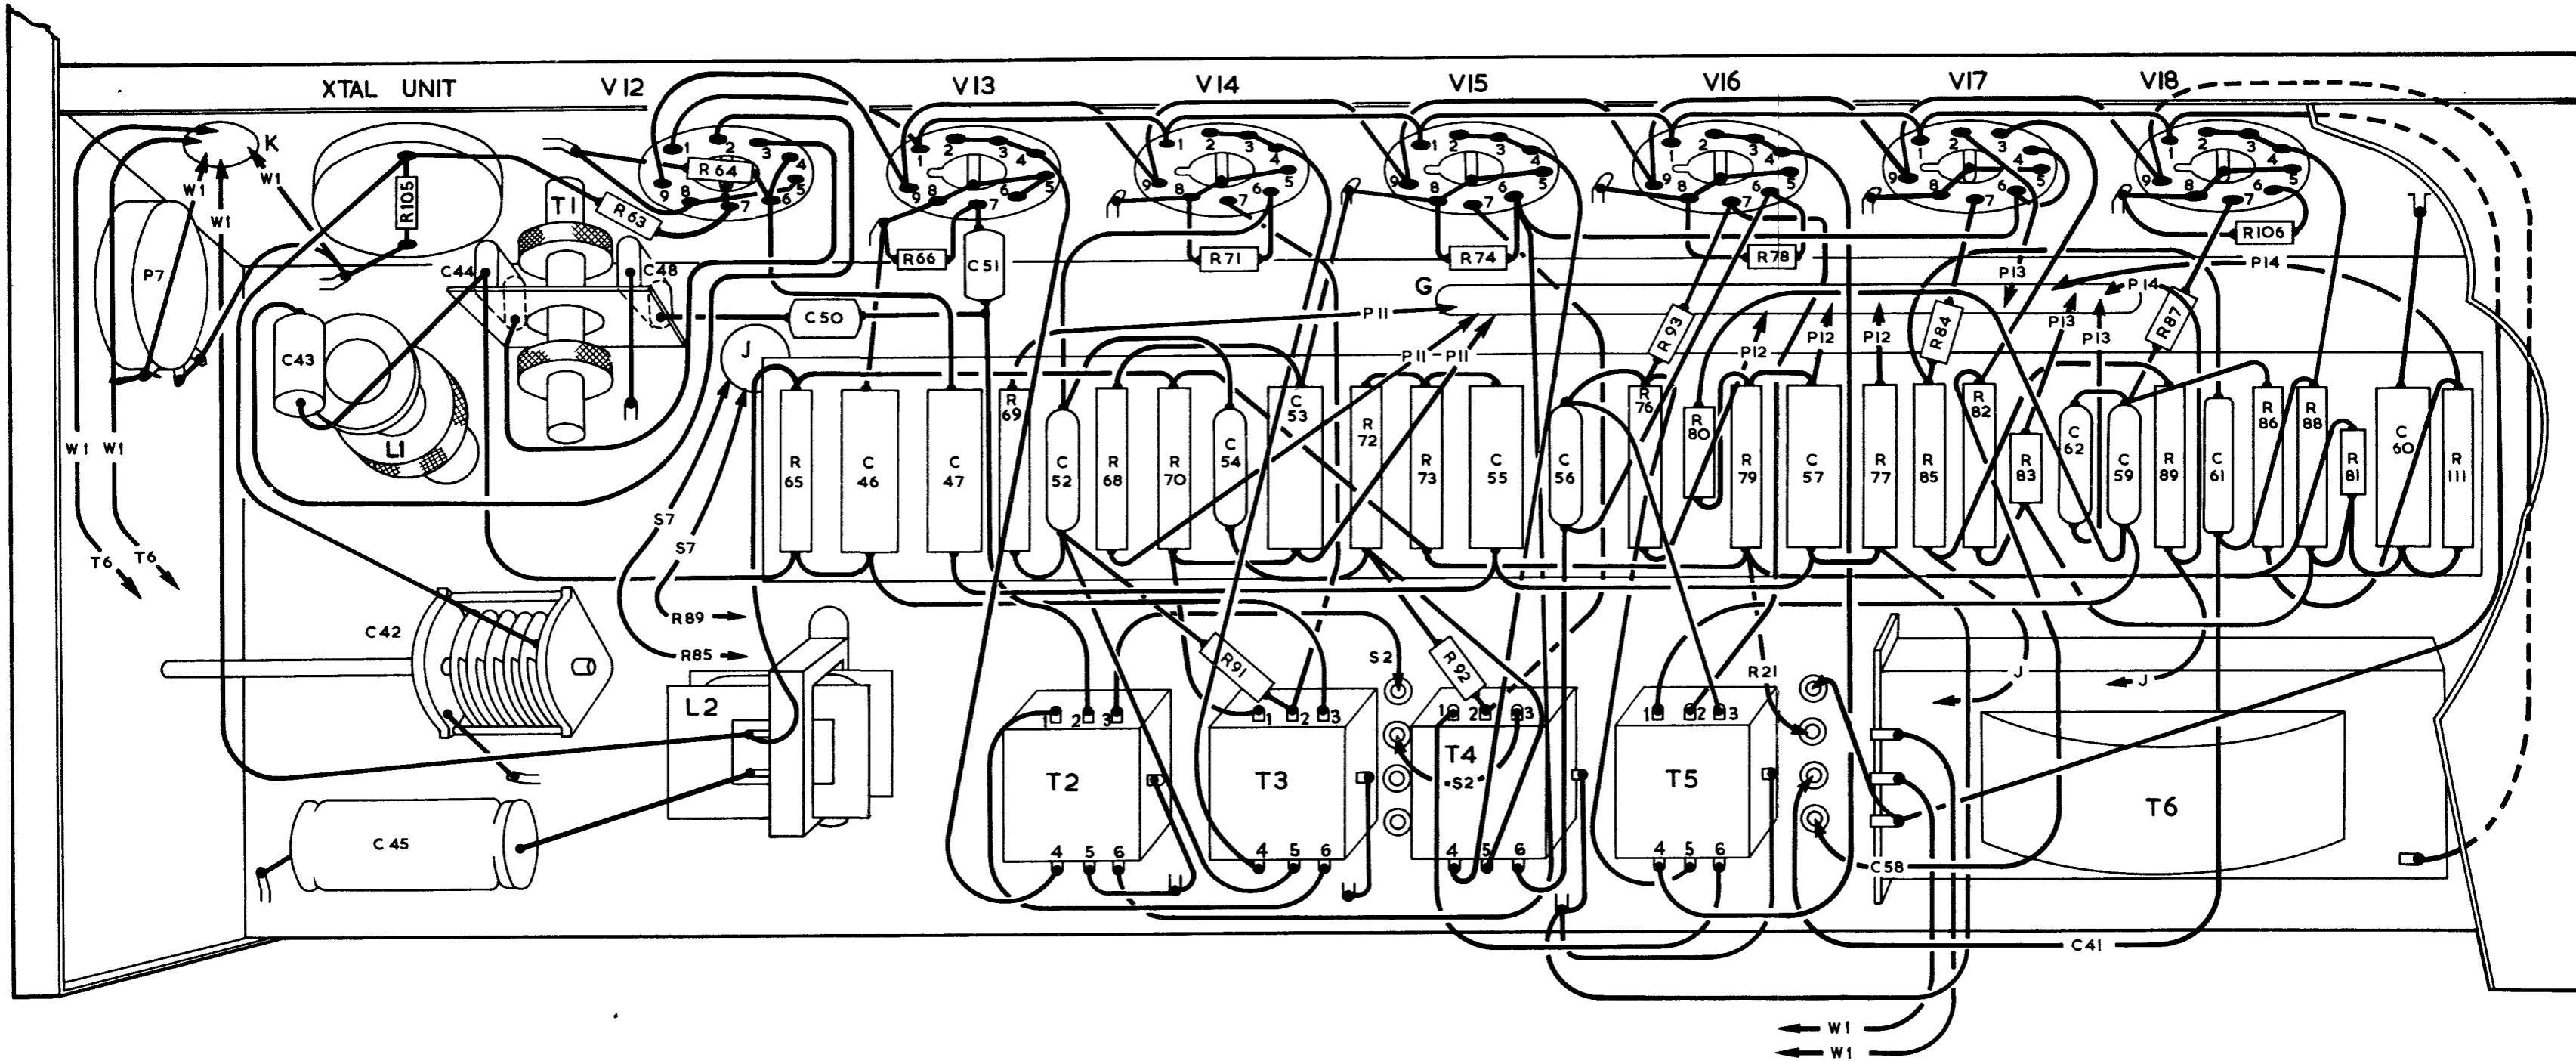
BENCH WIRING OF INDICATING UNIT TYPE 62A - SIDE COMPARTMENT
